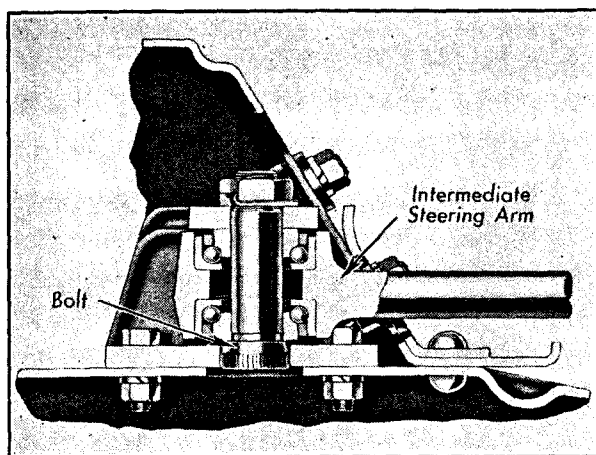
Sectional view of LaSalle intermediate steering arm assembly.
